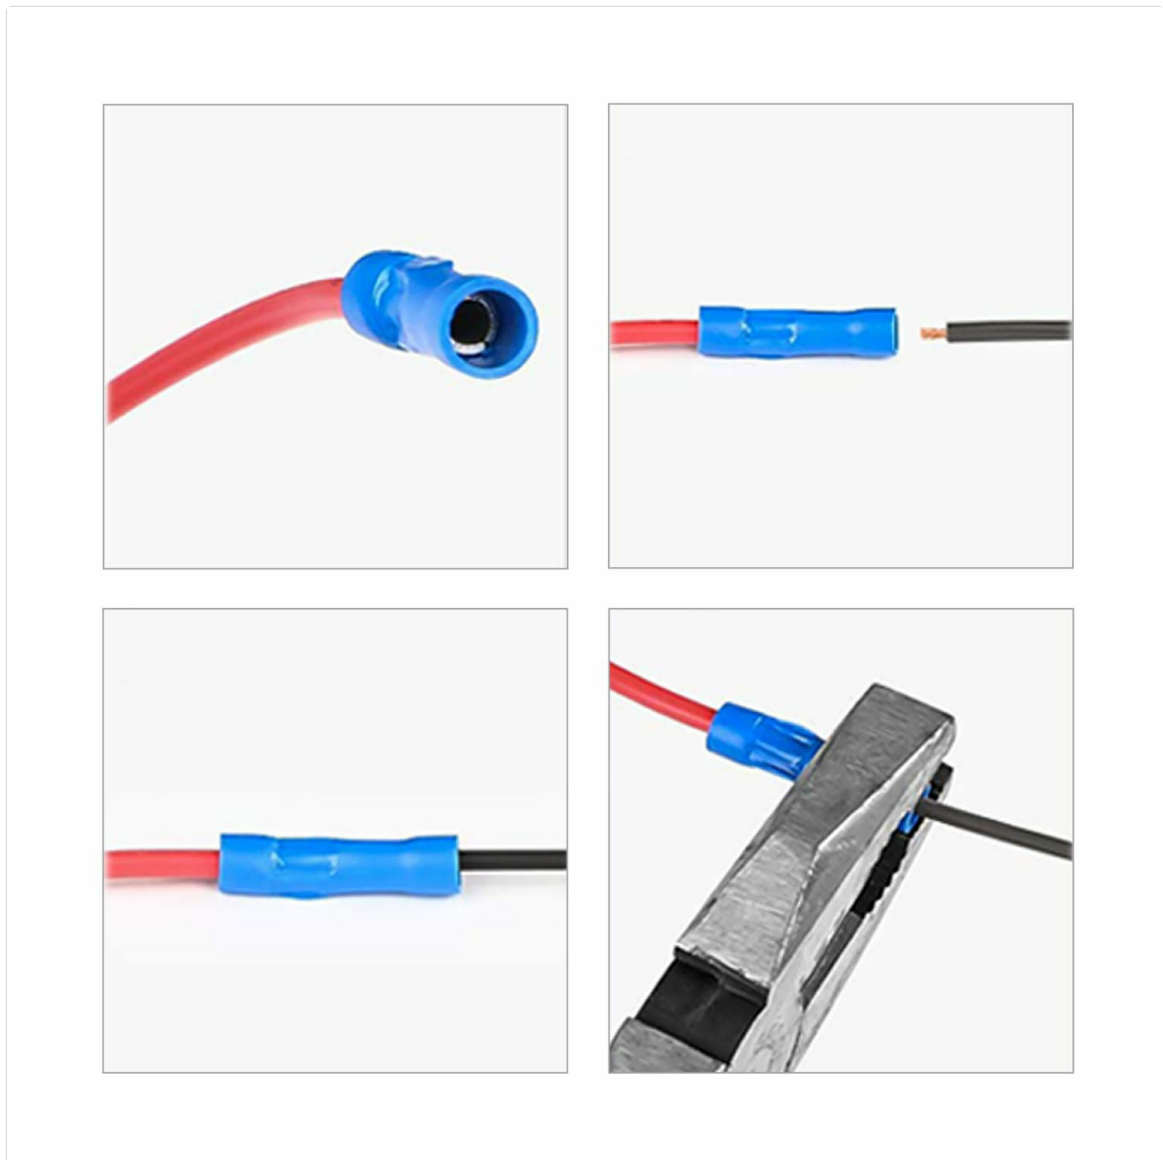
Visual guide for making a secure crimp connection to the fuse tap's wire.
